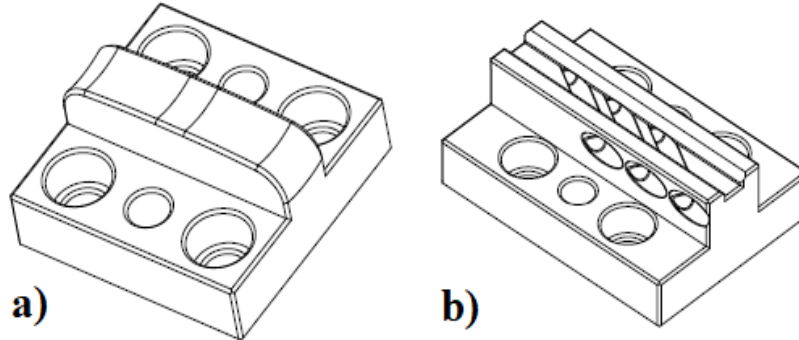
Contact pads for (a) wire-to-clamp and (b) wire-to-wire contact configurations
